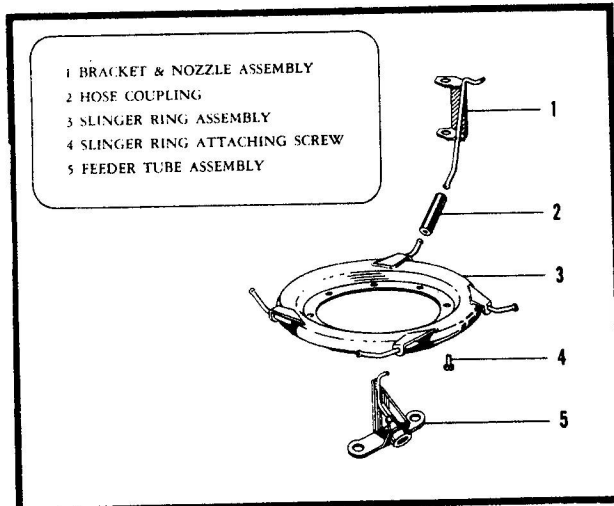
De-icing Device Assembly for Models 24D50 and 24D60
